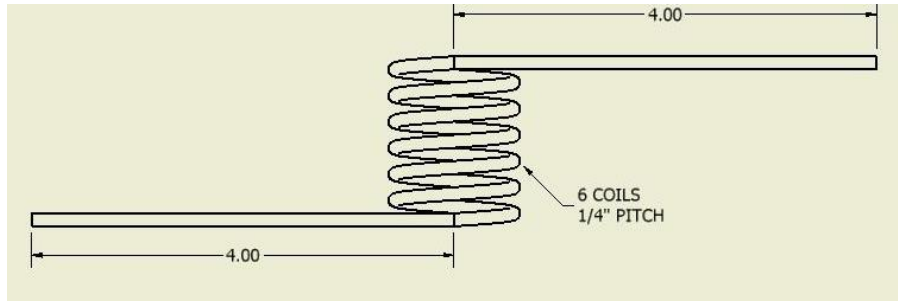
Mettler Toledo Tga helical test Coil Heat Exchanger
